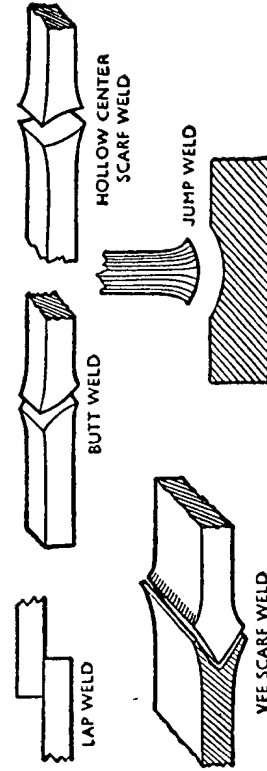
Representative types of hand-made hammer welds as produced when using a blacksmith's forge. Good hammer welds should have about 75 percent of the strength of the metal. Chain is commonly made by hammer welding.
